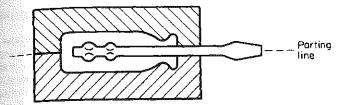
Irregularly shaped inserts are placed on the parting line of the mold.
